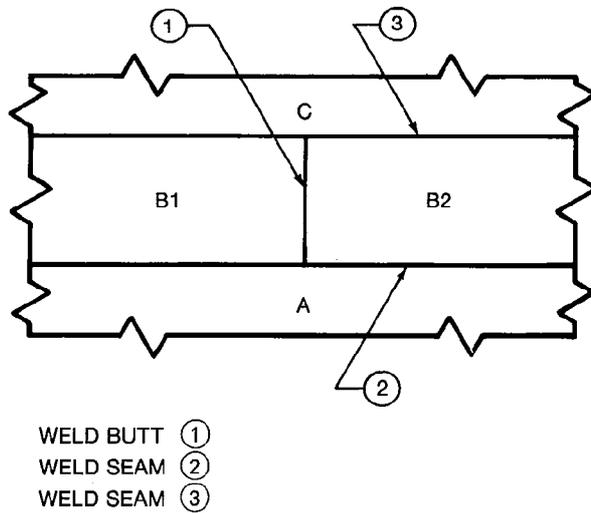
Welding Sequence for Plate Butt and Adjacent Seams
